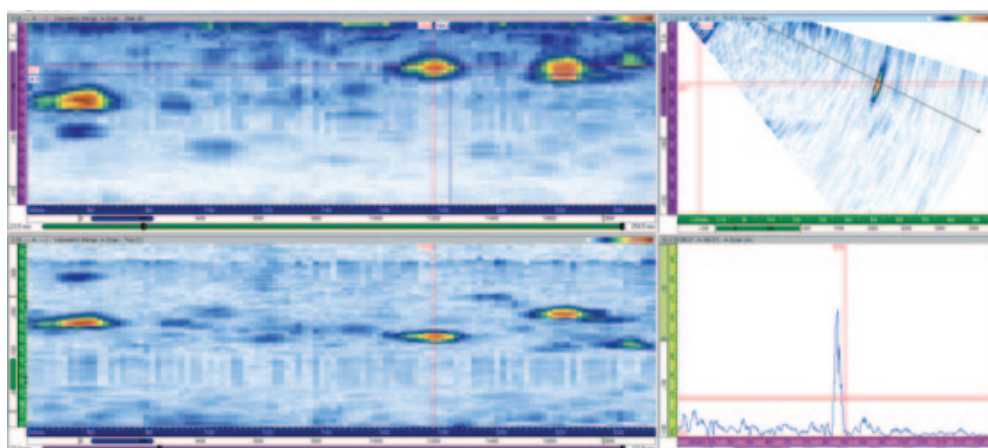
Examples of Phased array inspection results (Reproduced courtesy: Institut de Soudure)
